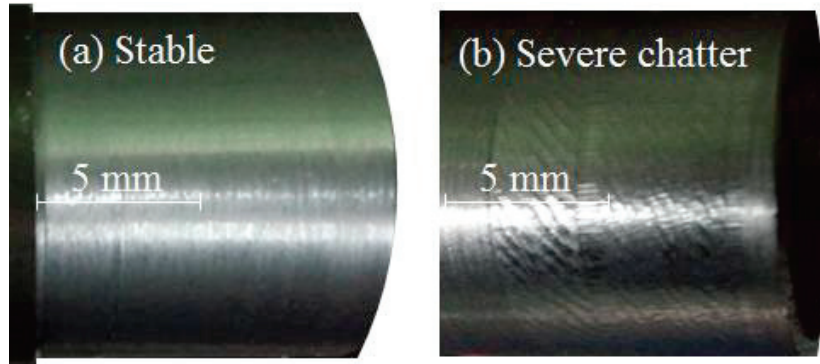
Machined surfaces obtained in turning of thin-tubular workpieces for wall-thickness $t = 3$ mm.
